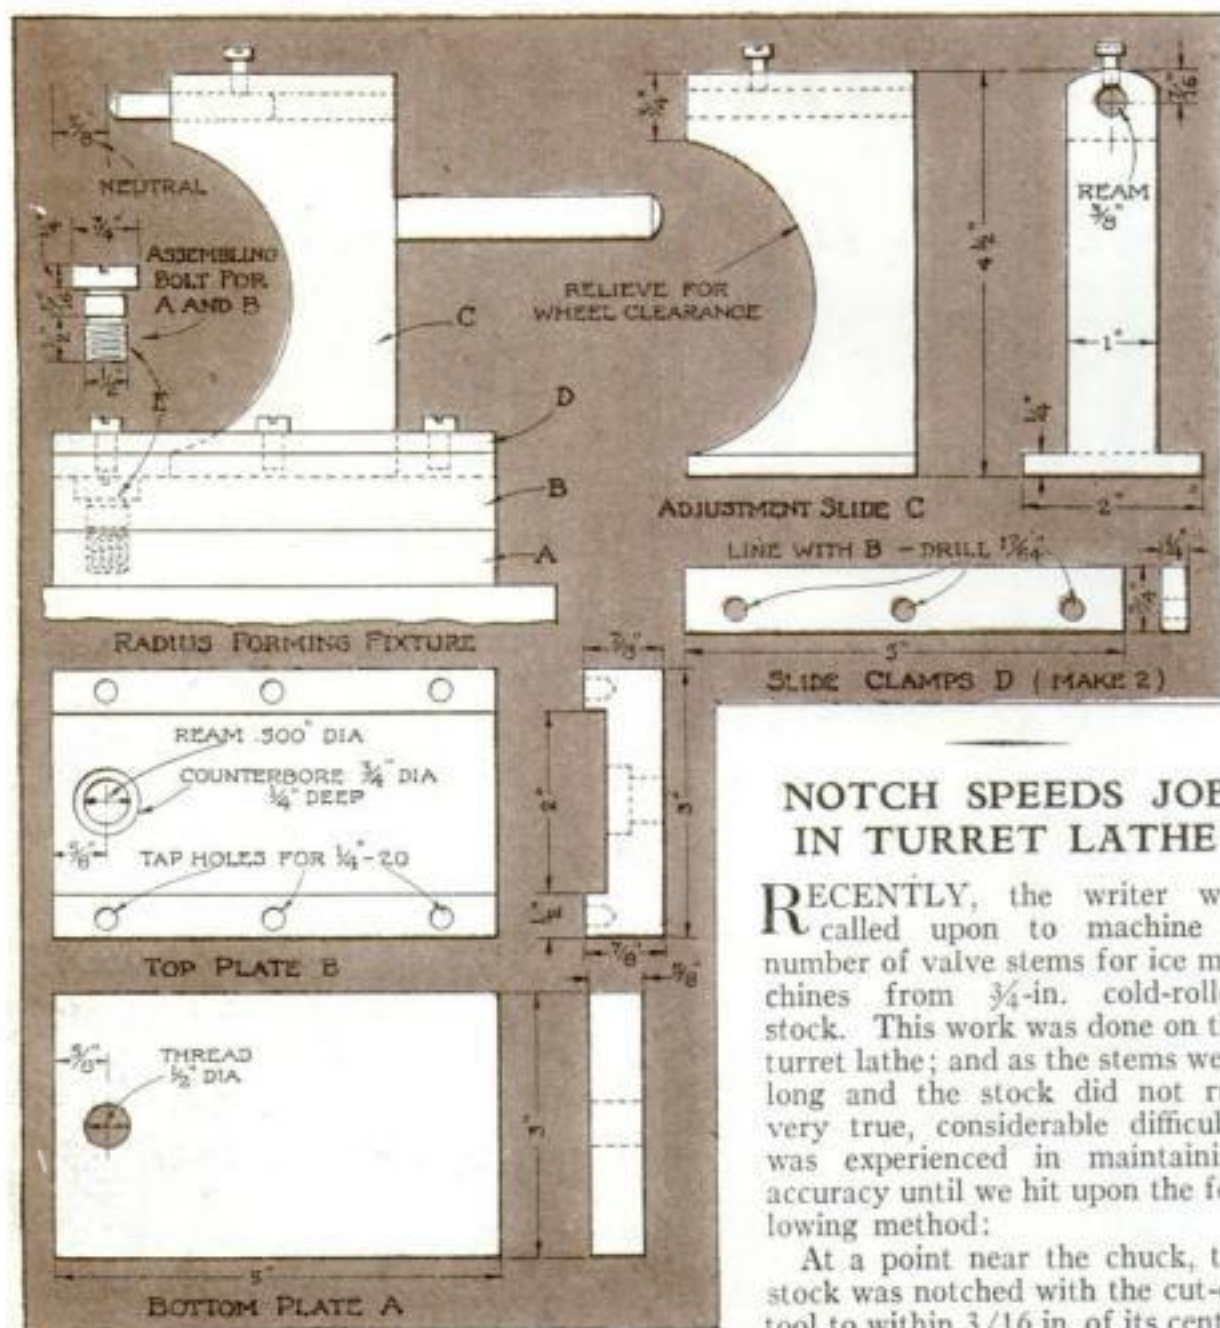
Assembled view of the radius forming fixture and detailed views of the parts.
